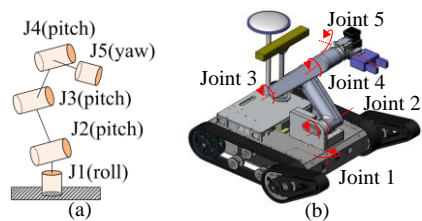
Surveillance manipulator: (a) joint structure and (b) assembly with mobile platform.
